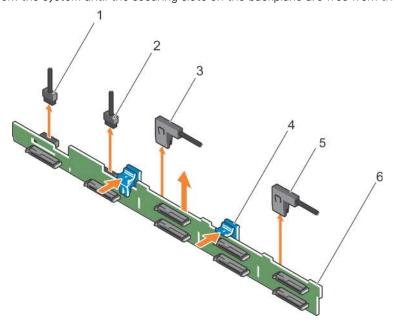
Removing the 2.5-inch (x8) hard drive backplane
